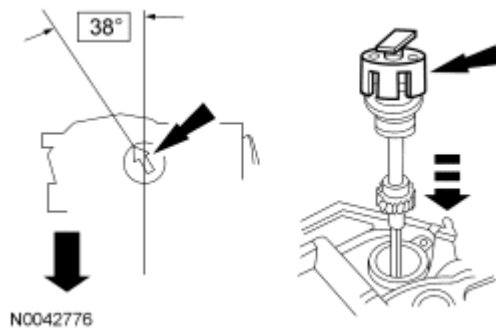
Installing Camshaft Synchronizer Housing Assembly
